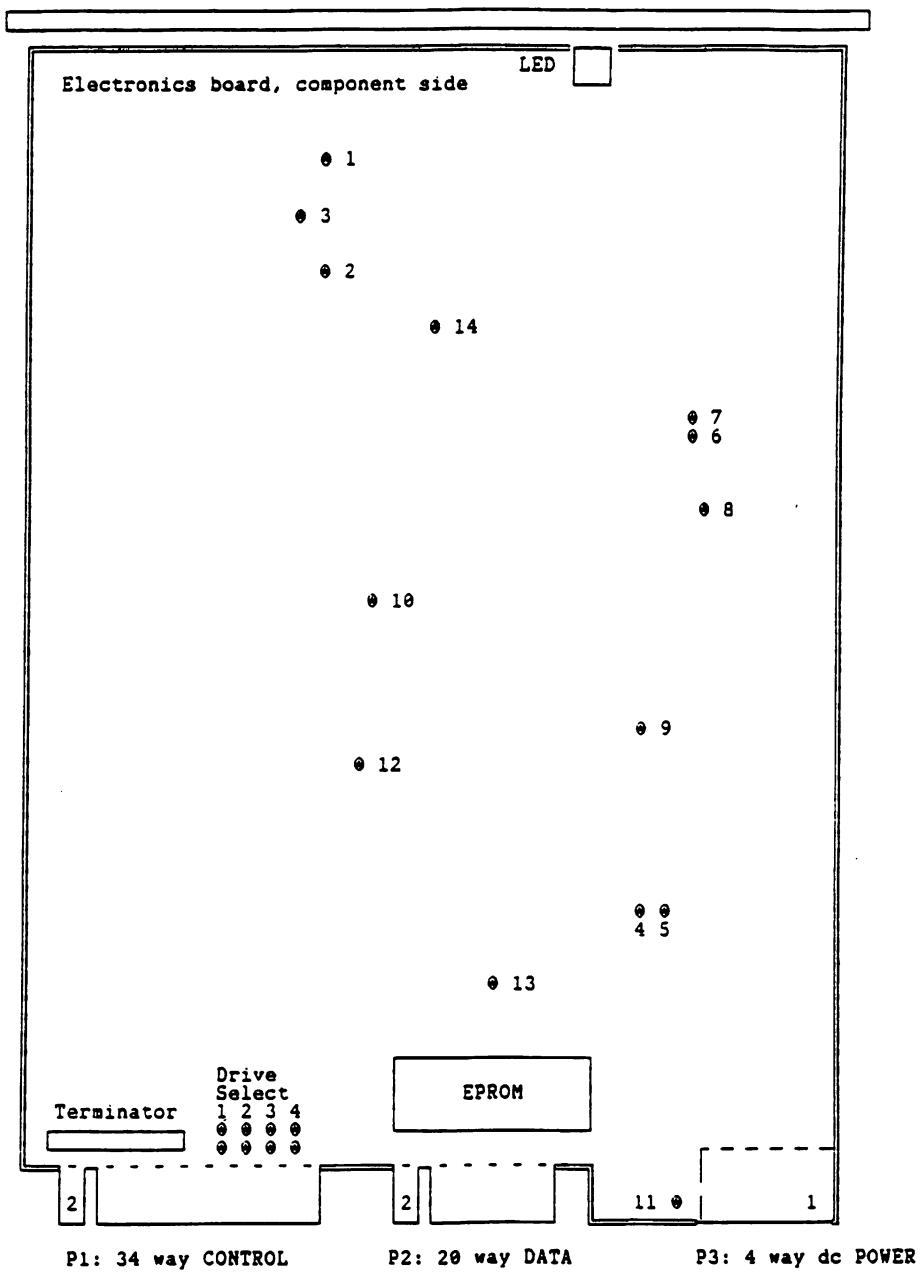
70 MEG Rodime 5090 5 1/4" ST506 Hard Drive
